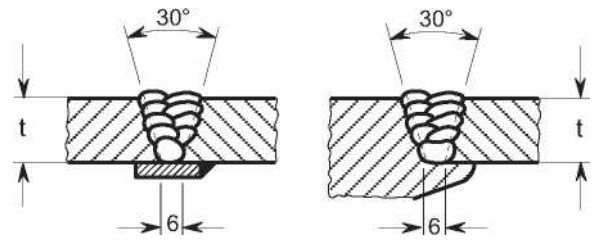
Single-side welds with permanent weldpool supports (backings)
